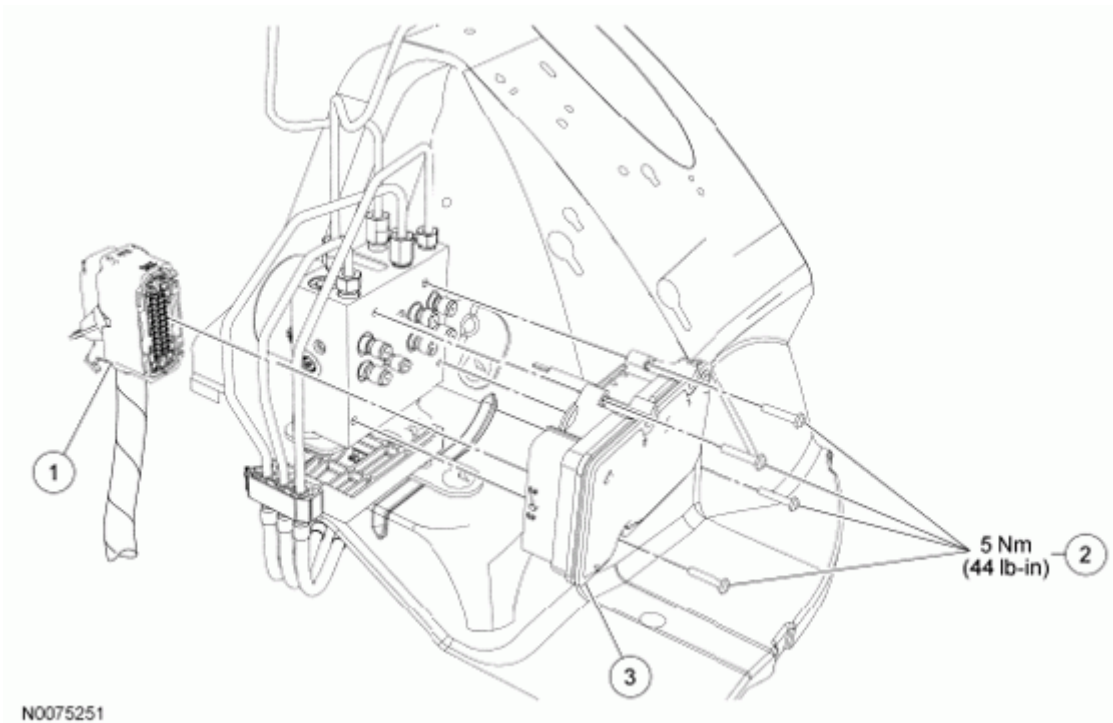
Exploded View Of Anti Lock Brake System Module With Torque Specifications
